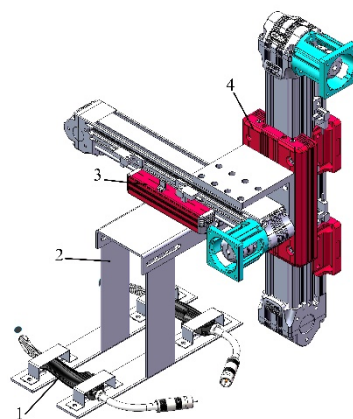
Welding actuator structure diagram. 1. Welding torch; 2. welding torch bracket; 3. X axis linear slider; 4. Z axis linear slider.
